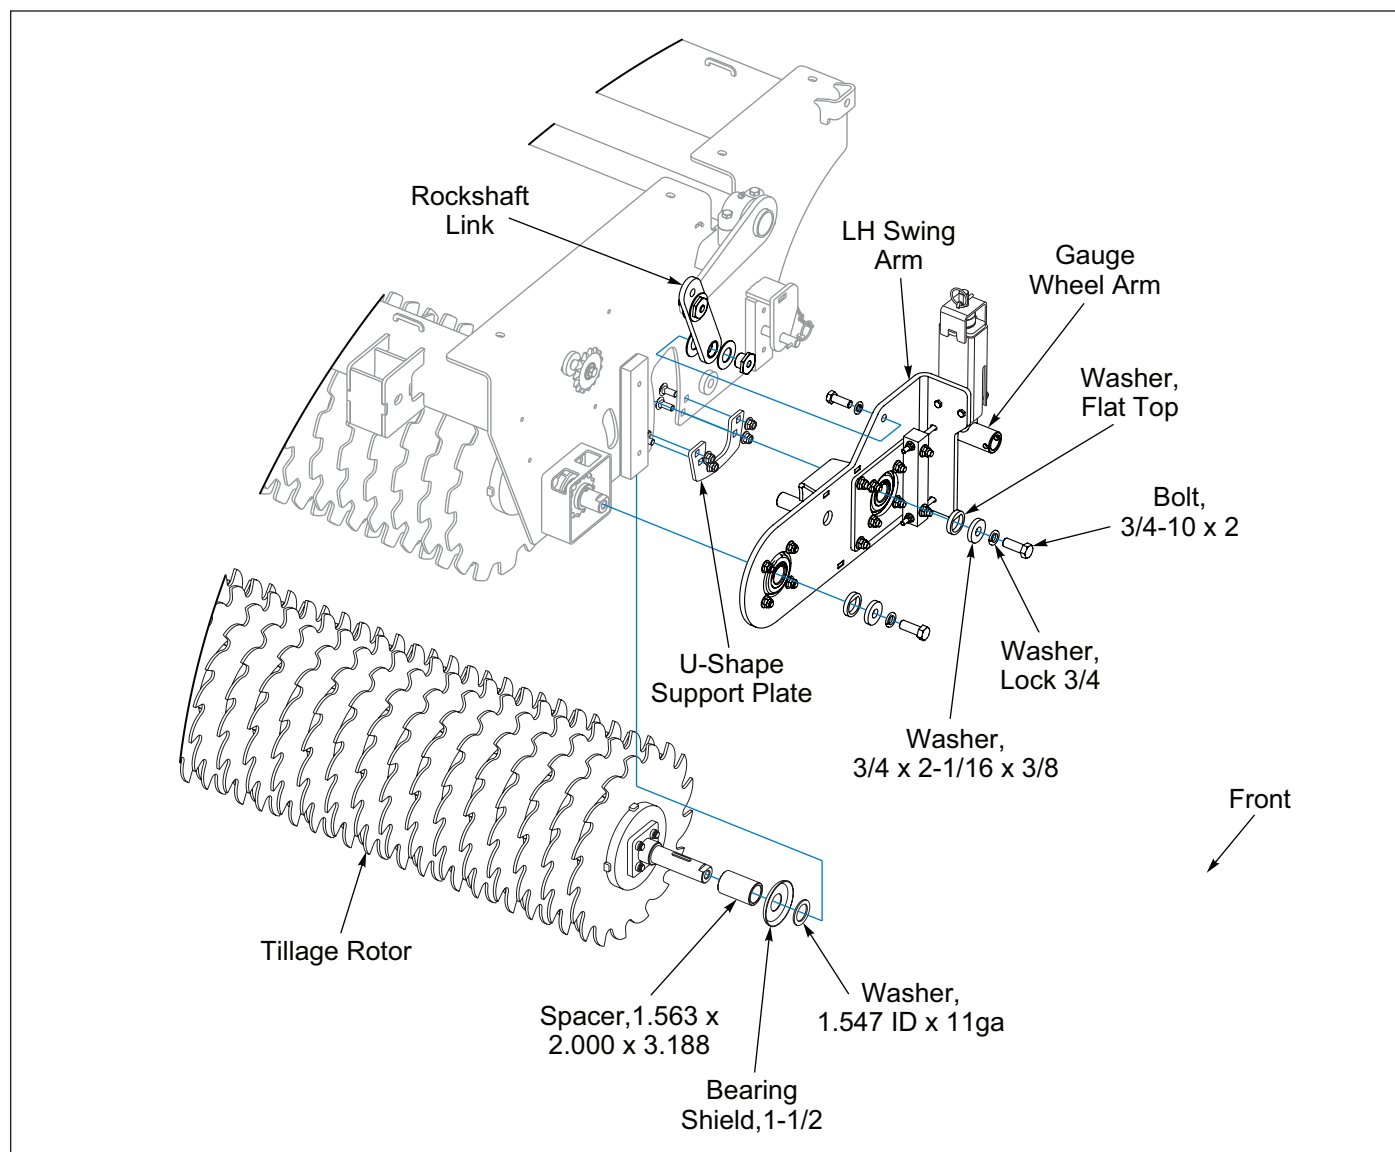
Tillage Rotor Blade Repair - RH Side
